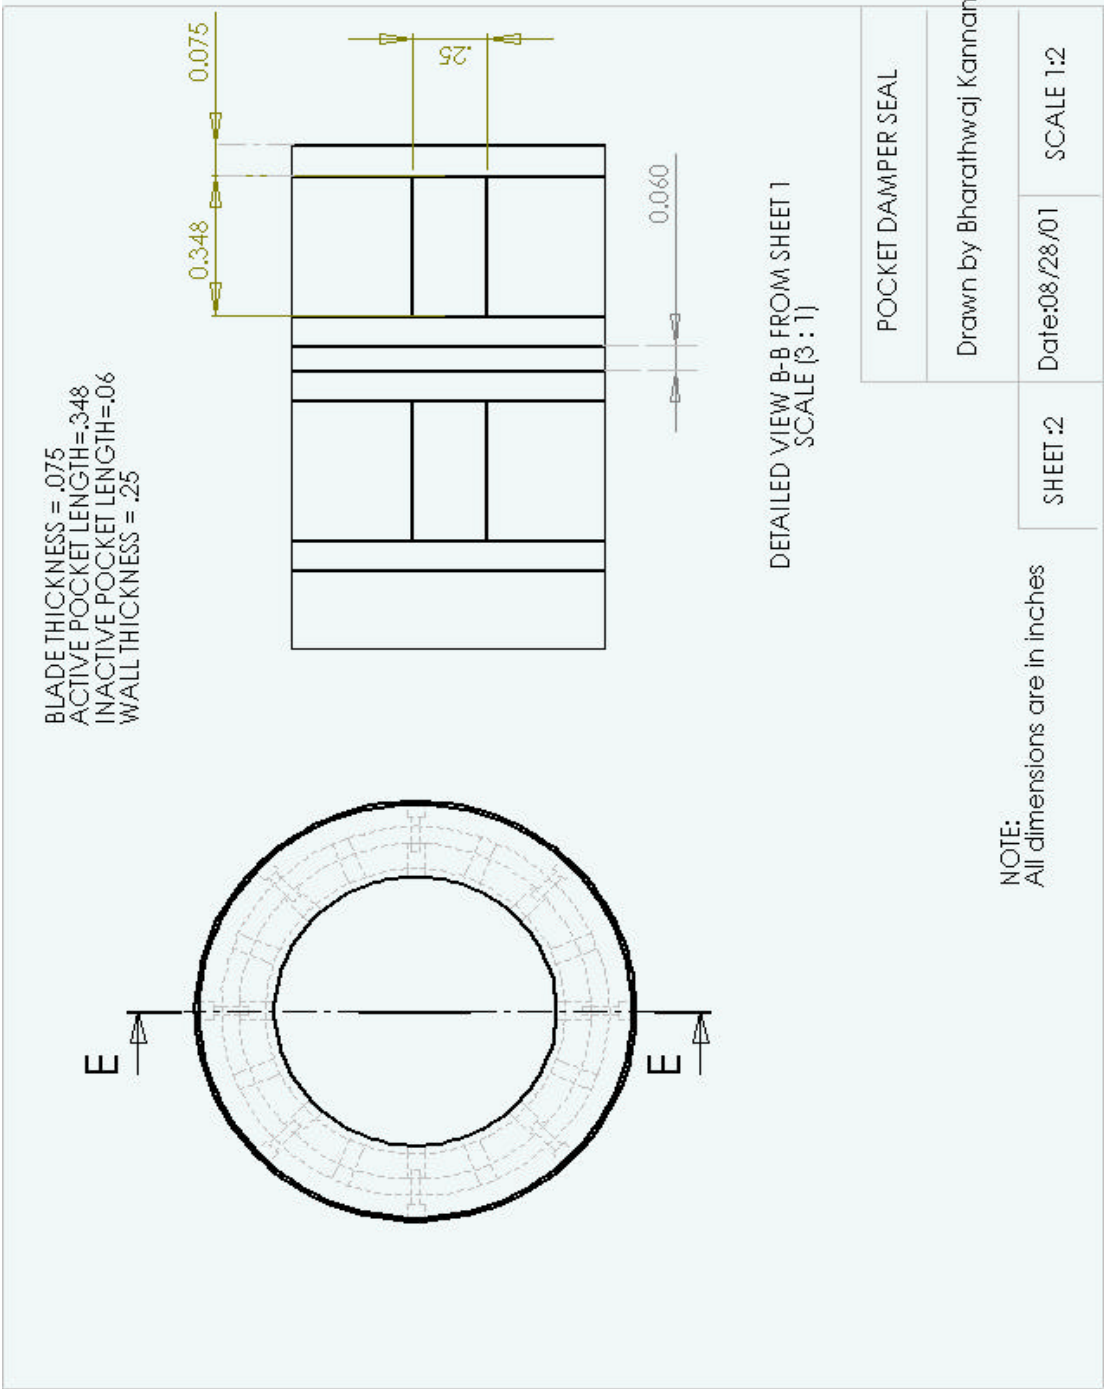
Detailed drawing of the PDS used in the rotating tests (Sheet II)
